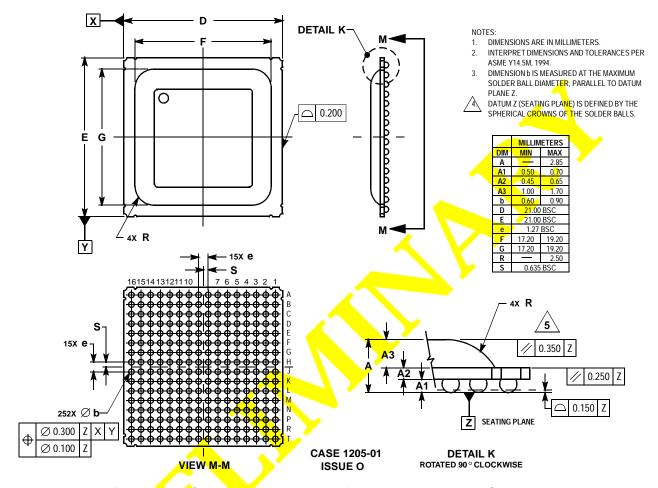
DSP56301 Mechanical Information, 252-pin PBGA Package
